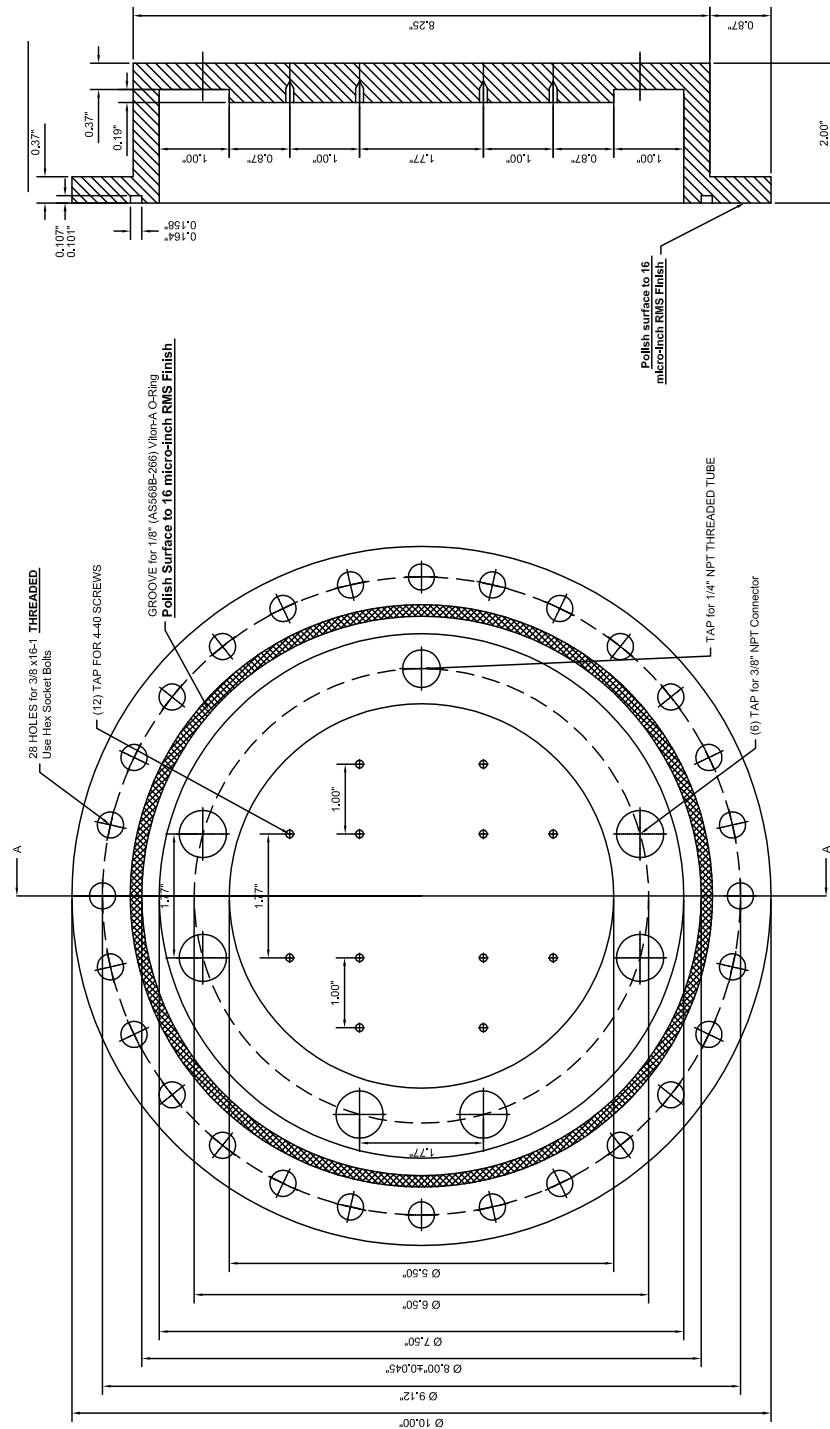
Technical drawing of the aluminium (6061) gas containment chamber used in the THGEM imaging detector. The chamber is sealed by a lid with interchangeable entrance window types.
